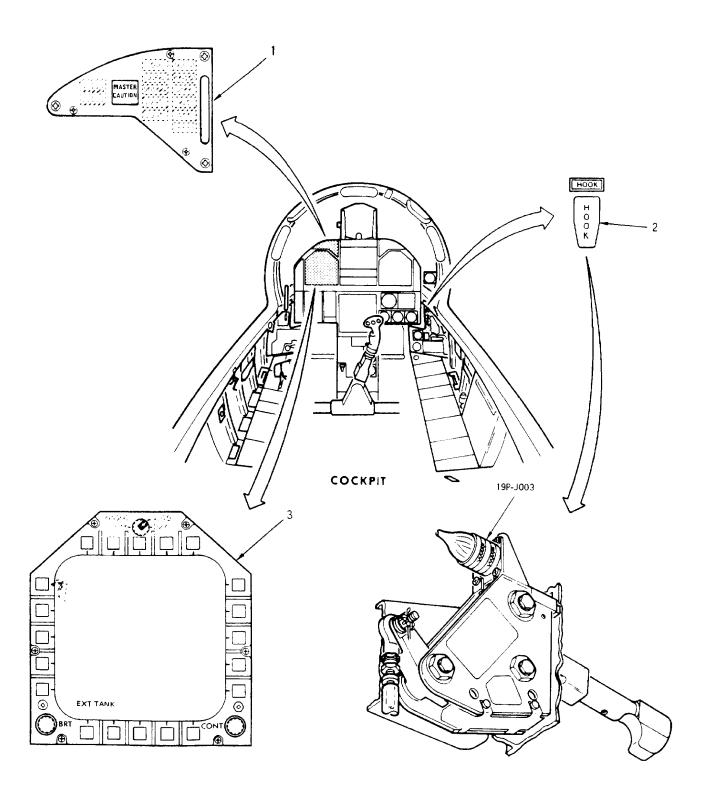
External Fuel System Component Locator (Sheet 1 of 13)
